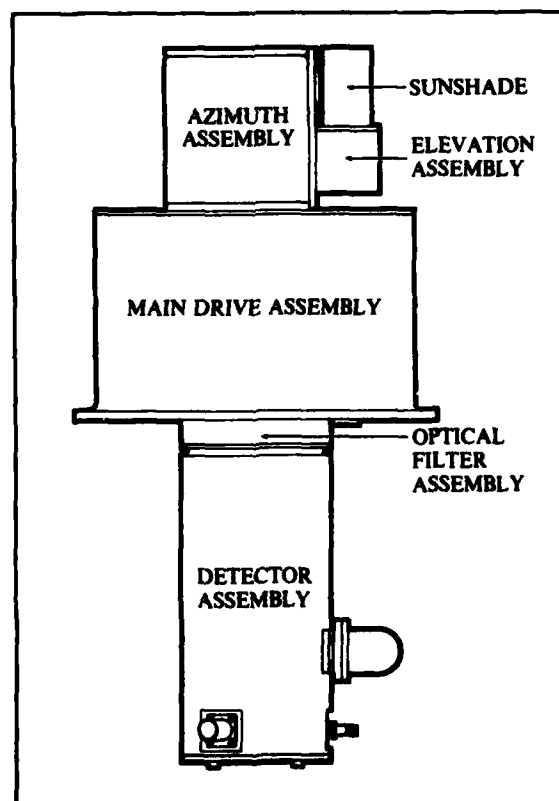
Automatic  $2\pi$  scanner outline drawing.
